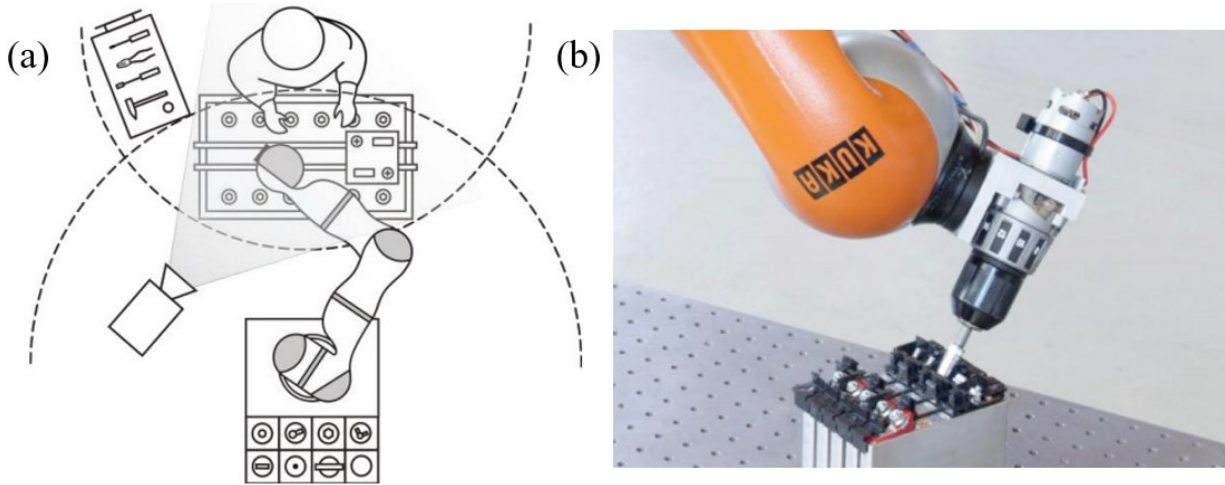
(a) Hybrid disassembly workstation and (b) Robot flange with electric screwdriver⁹⁰.
